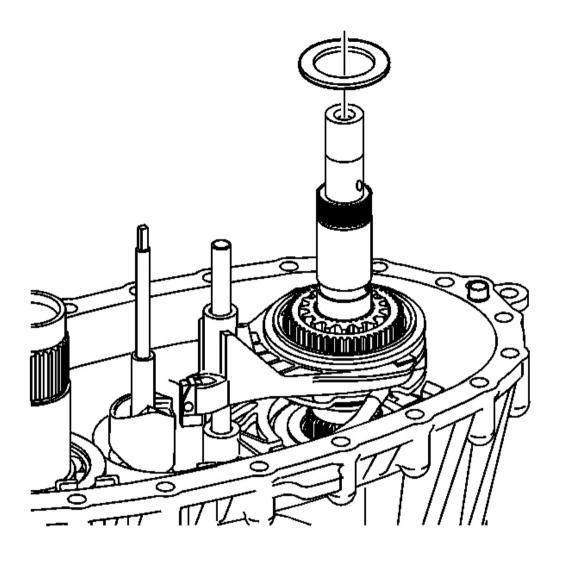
Identifying Drive Sprocket Thrust Washer Courtesy of GENERAL MOTORS CORP.
